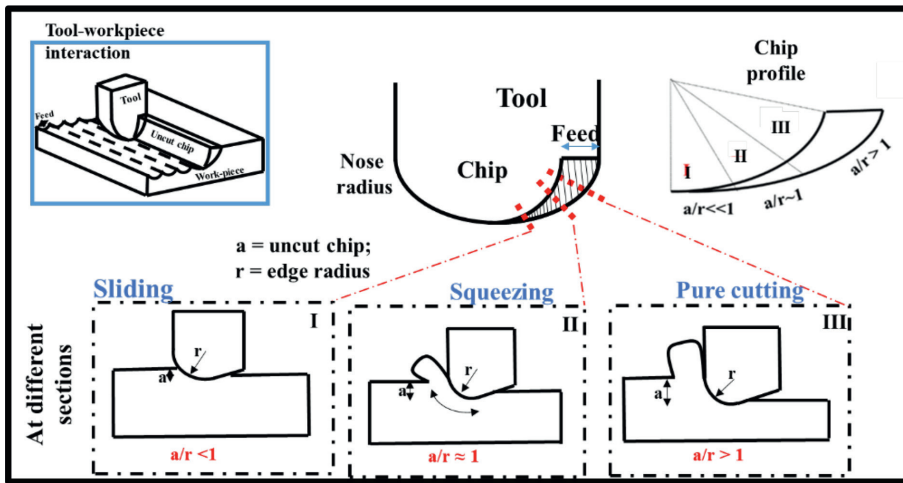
Cutting mechanism along the chip profile for the workpiece machined with round nose diamond tool.
